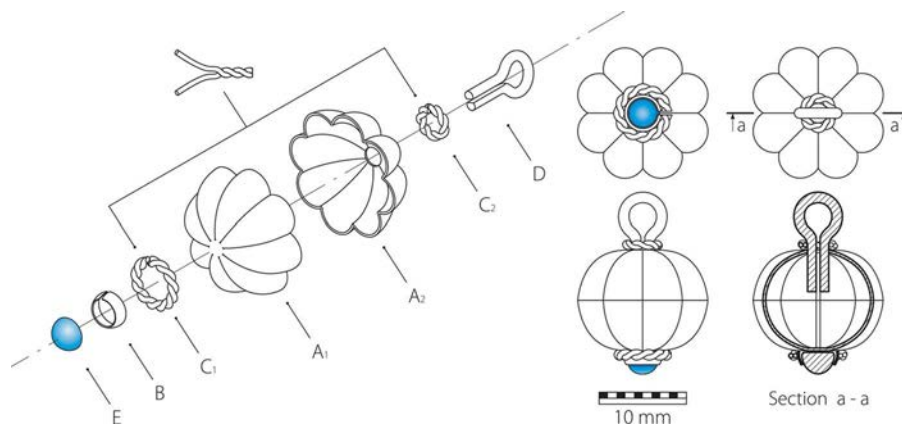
Gombik 74B-2: exploded view showing the different components: A₁ lower octolobed shell; A₂ upper octolobed shell; B bezel; C₁ lower twisted wire ring; C₂ upper twisted wire ring; D loop; E glass cabochon (drawing G. Plítková).
